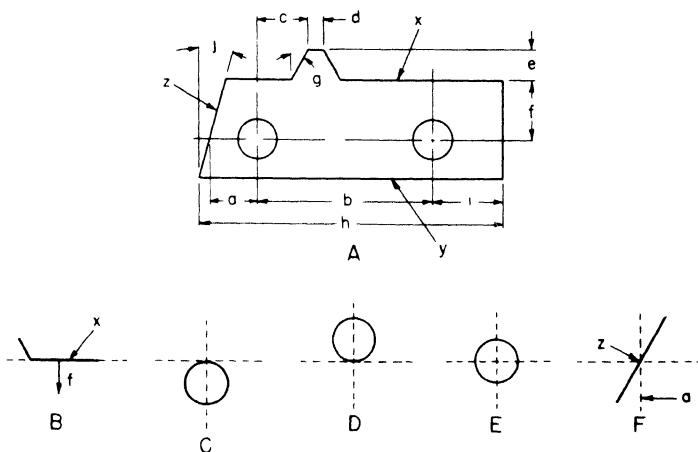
(A) Work-piece and relevant dimensions which are to be checked using a toolmakers' microscope. (B through F) Steps in obtaining the various dimensions shown in (A).
